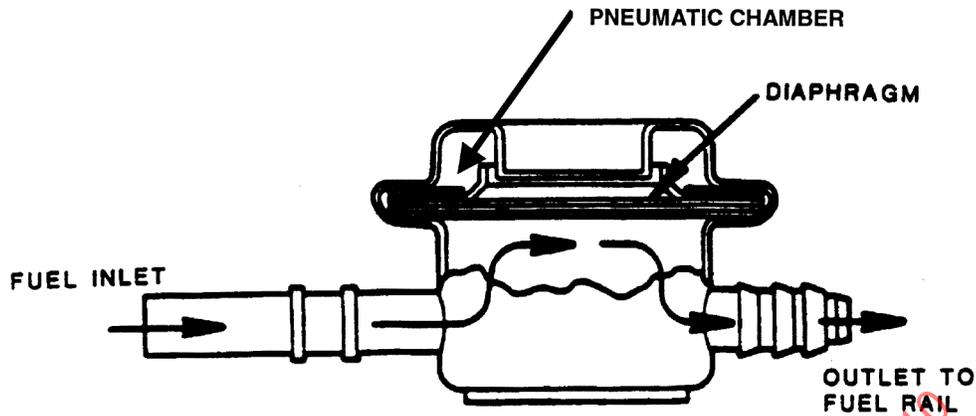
FUEL PRESSURE DAMPER (HYDRAULIC SPRING)
